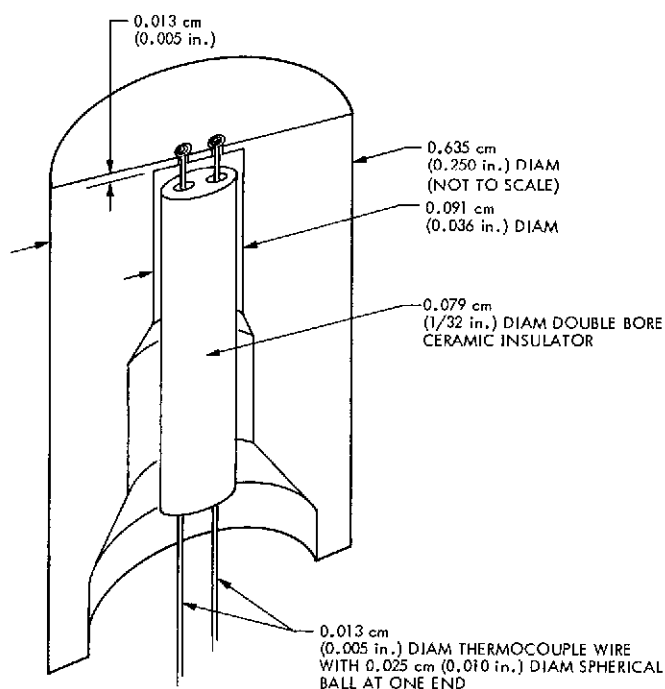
Assembly of parts for fusing thermocouple junction in thermocouple plug
